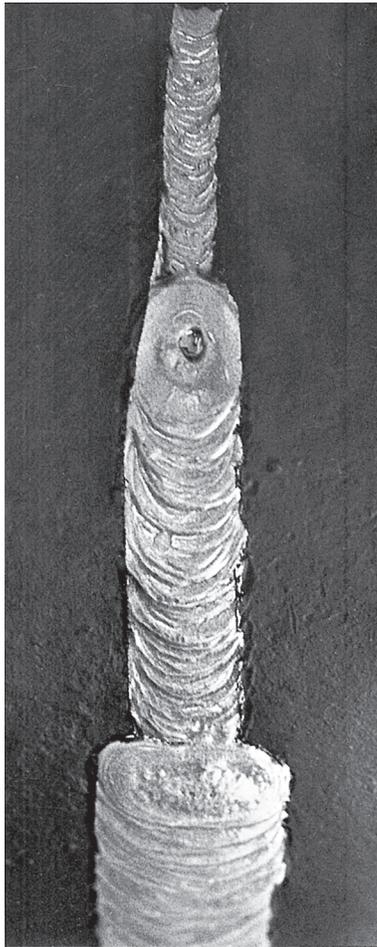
The ability to make multipass welds such as this one, on plate and pipe, led to the growth of the industry. Welds are sound and have uniform appearance.
